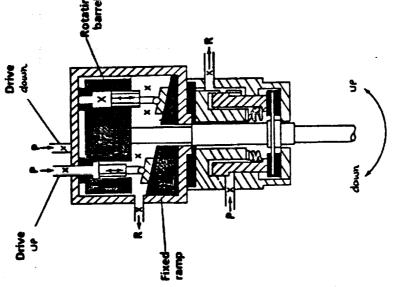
HYDRAULIC MOTOR/BRAKE ASSEMBLY
